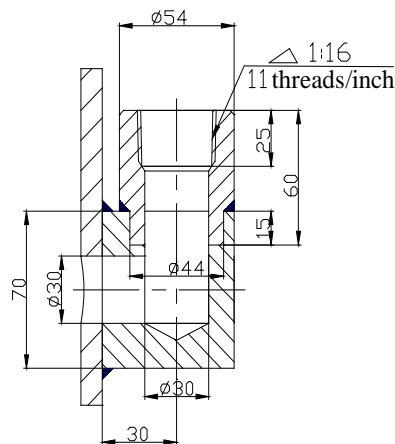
Sectional View of Steady of the Outside Monitoring Tube
